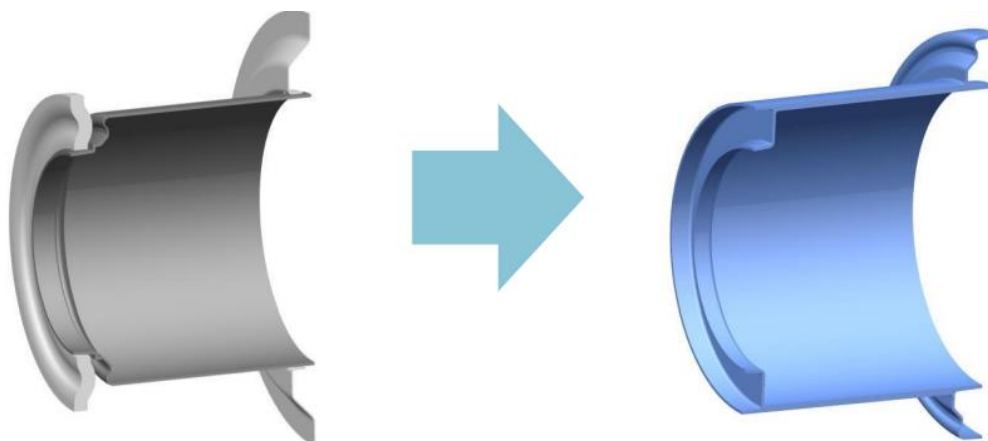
Change in sealing technology between bearings from EP1 (Left) to EP3 (Right)
